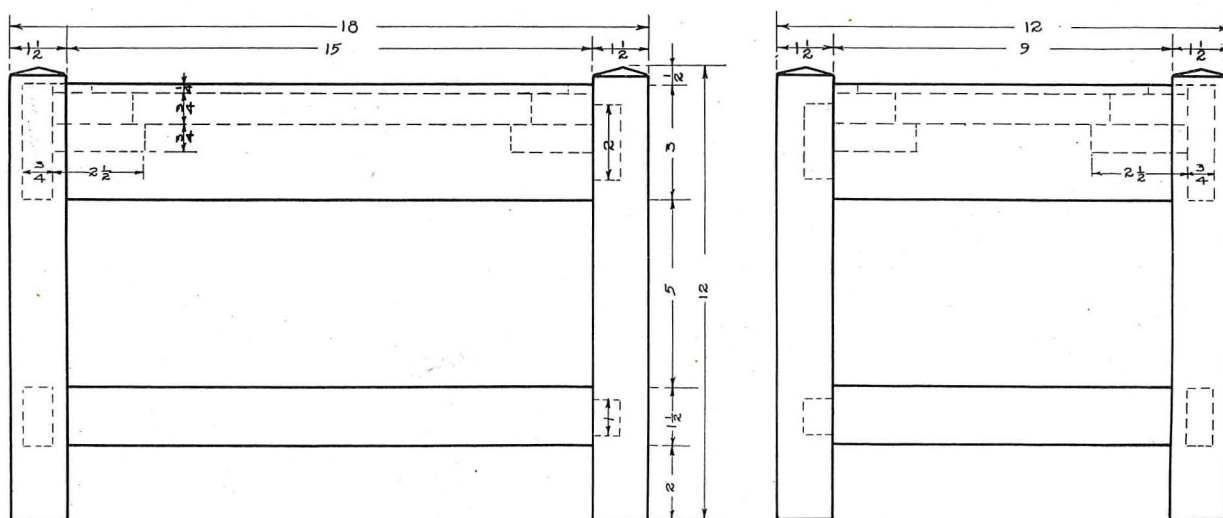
Working Drawing of Foot-Stool. Eighth Grade.
